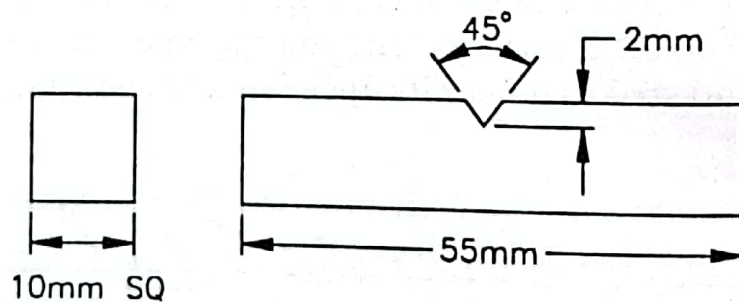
Principal dimensions of a Charpy impact test specimen.
